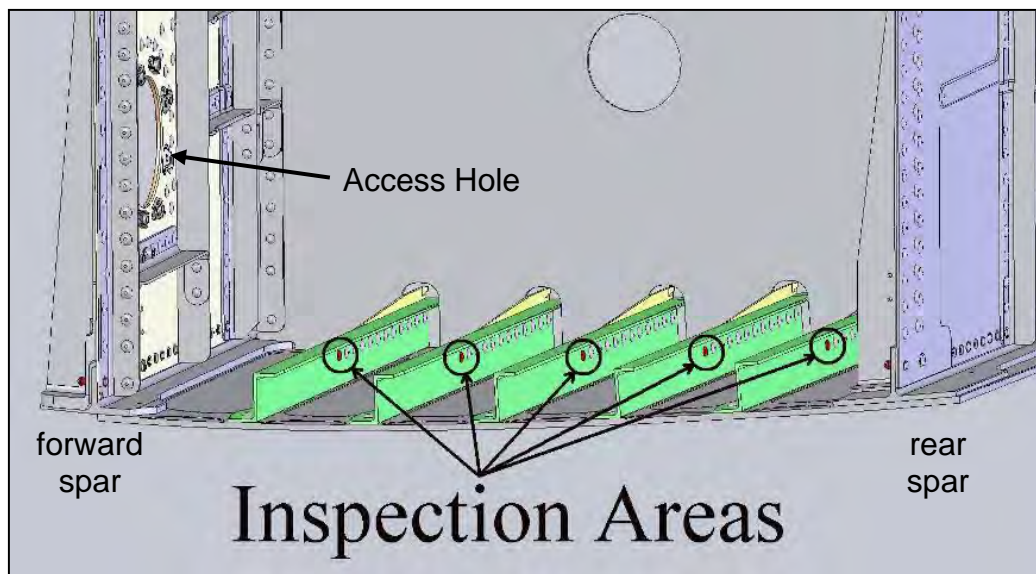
CAD view of the A10 cavity showing the inspection areas on the stringer runouts.
